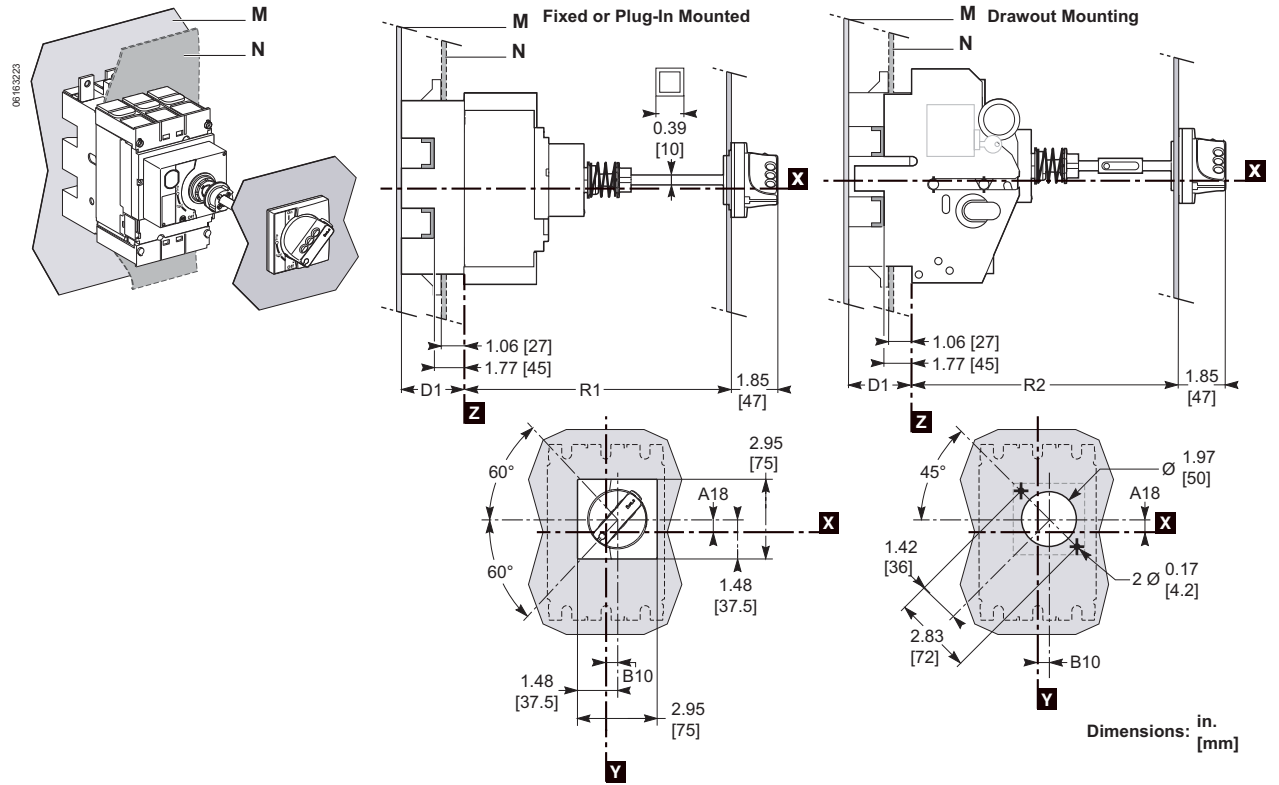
PowerPact L-Frame Circuit Breaker Extended Rotary Handle Mounting
